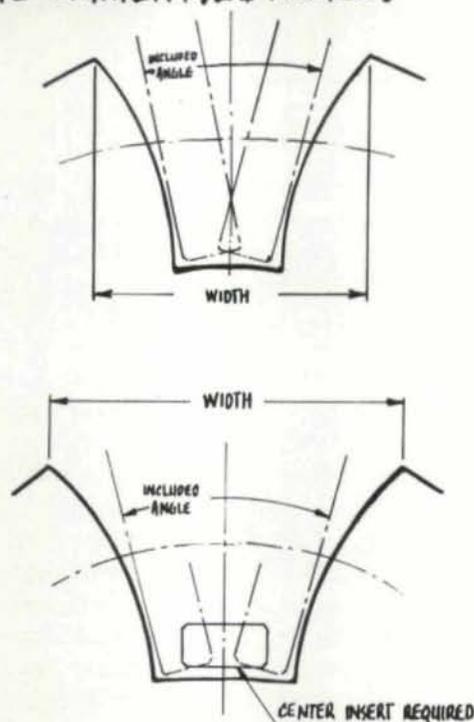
(Courtesy: Ingersol Cutting Tool Co.)
